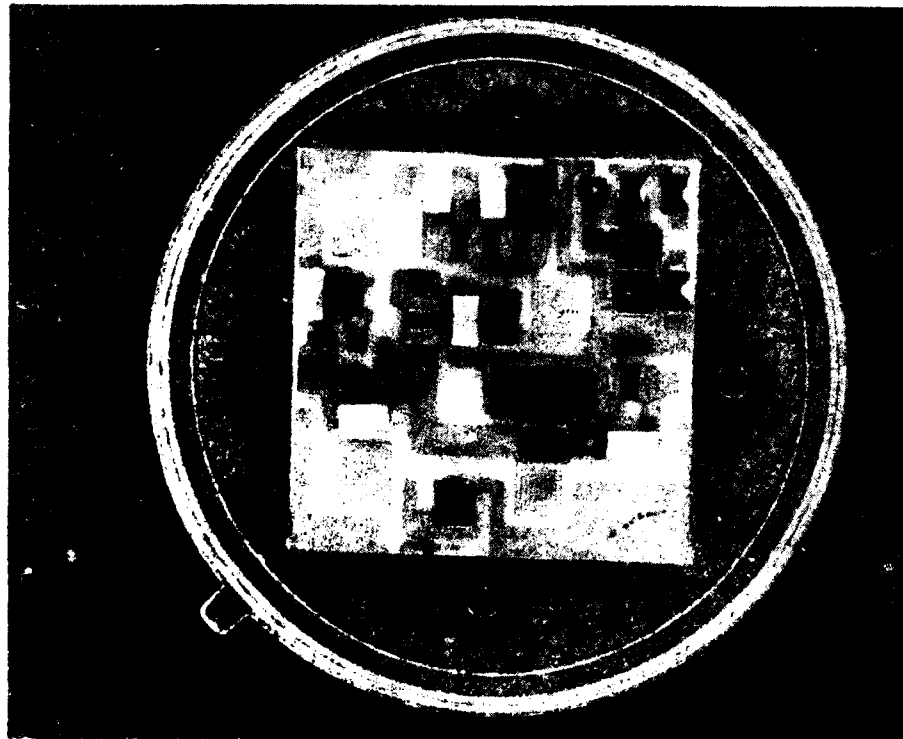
A completed oscillator circuit on ceramic substrate and mounted inside T0-8 package.
